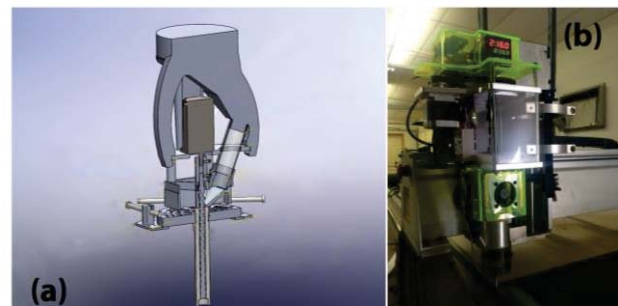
Pellet based extruders. (a) shows a design to be attached to a delta 3D printer. (b) is designed for a large scale 3D printer
